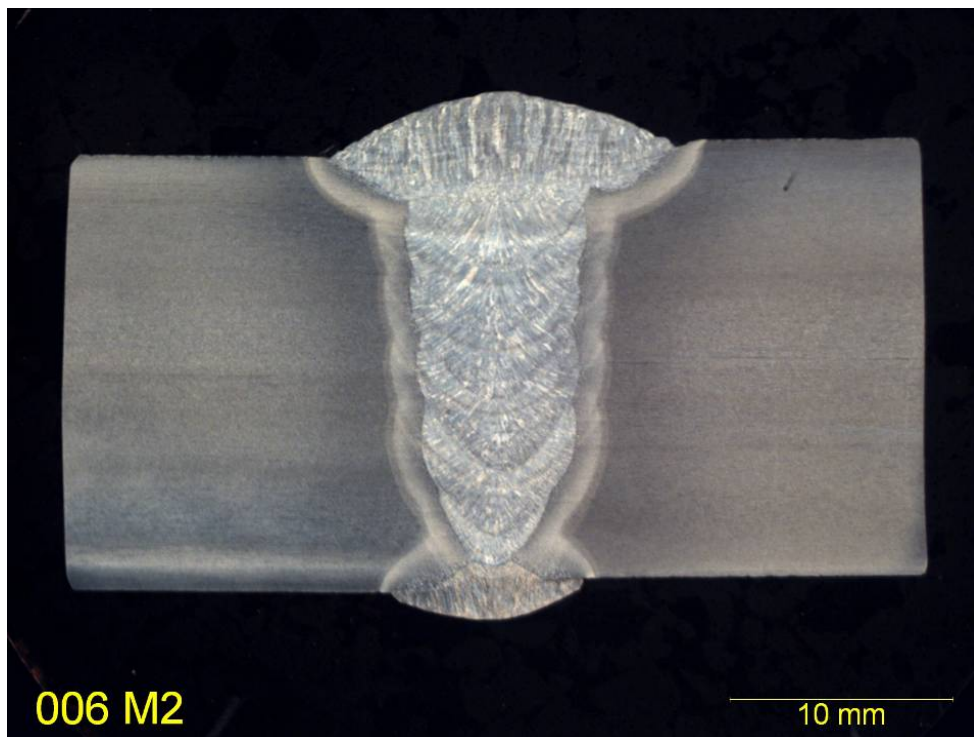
Photo-macrograph Showing Cross-section of Weld B6
